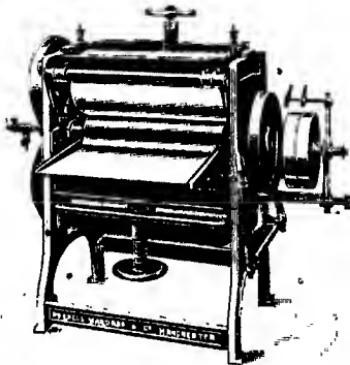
THREE-ROLL GLOSSING MACHINE.
